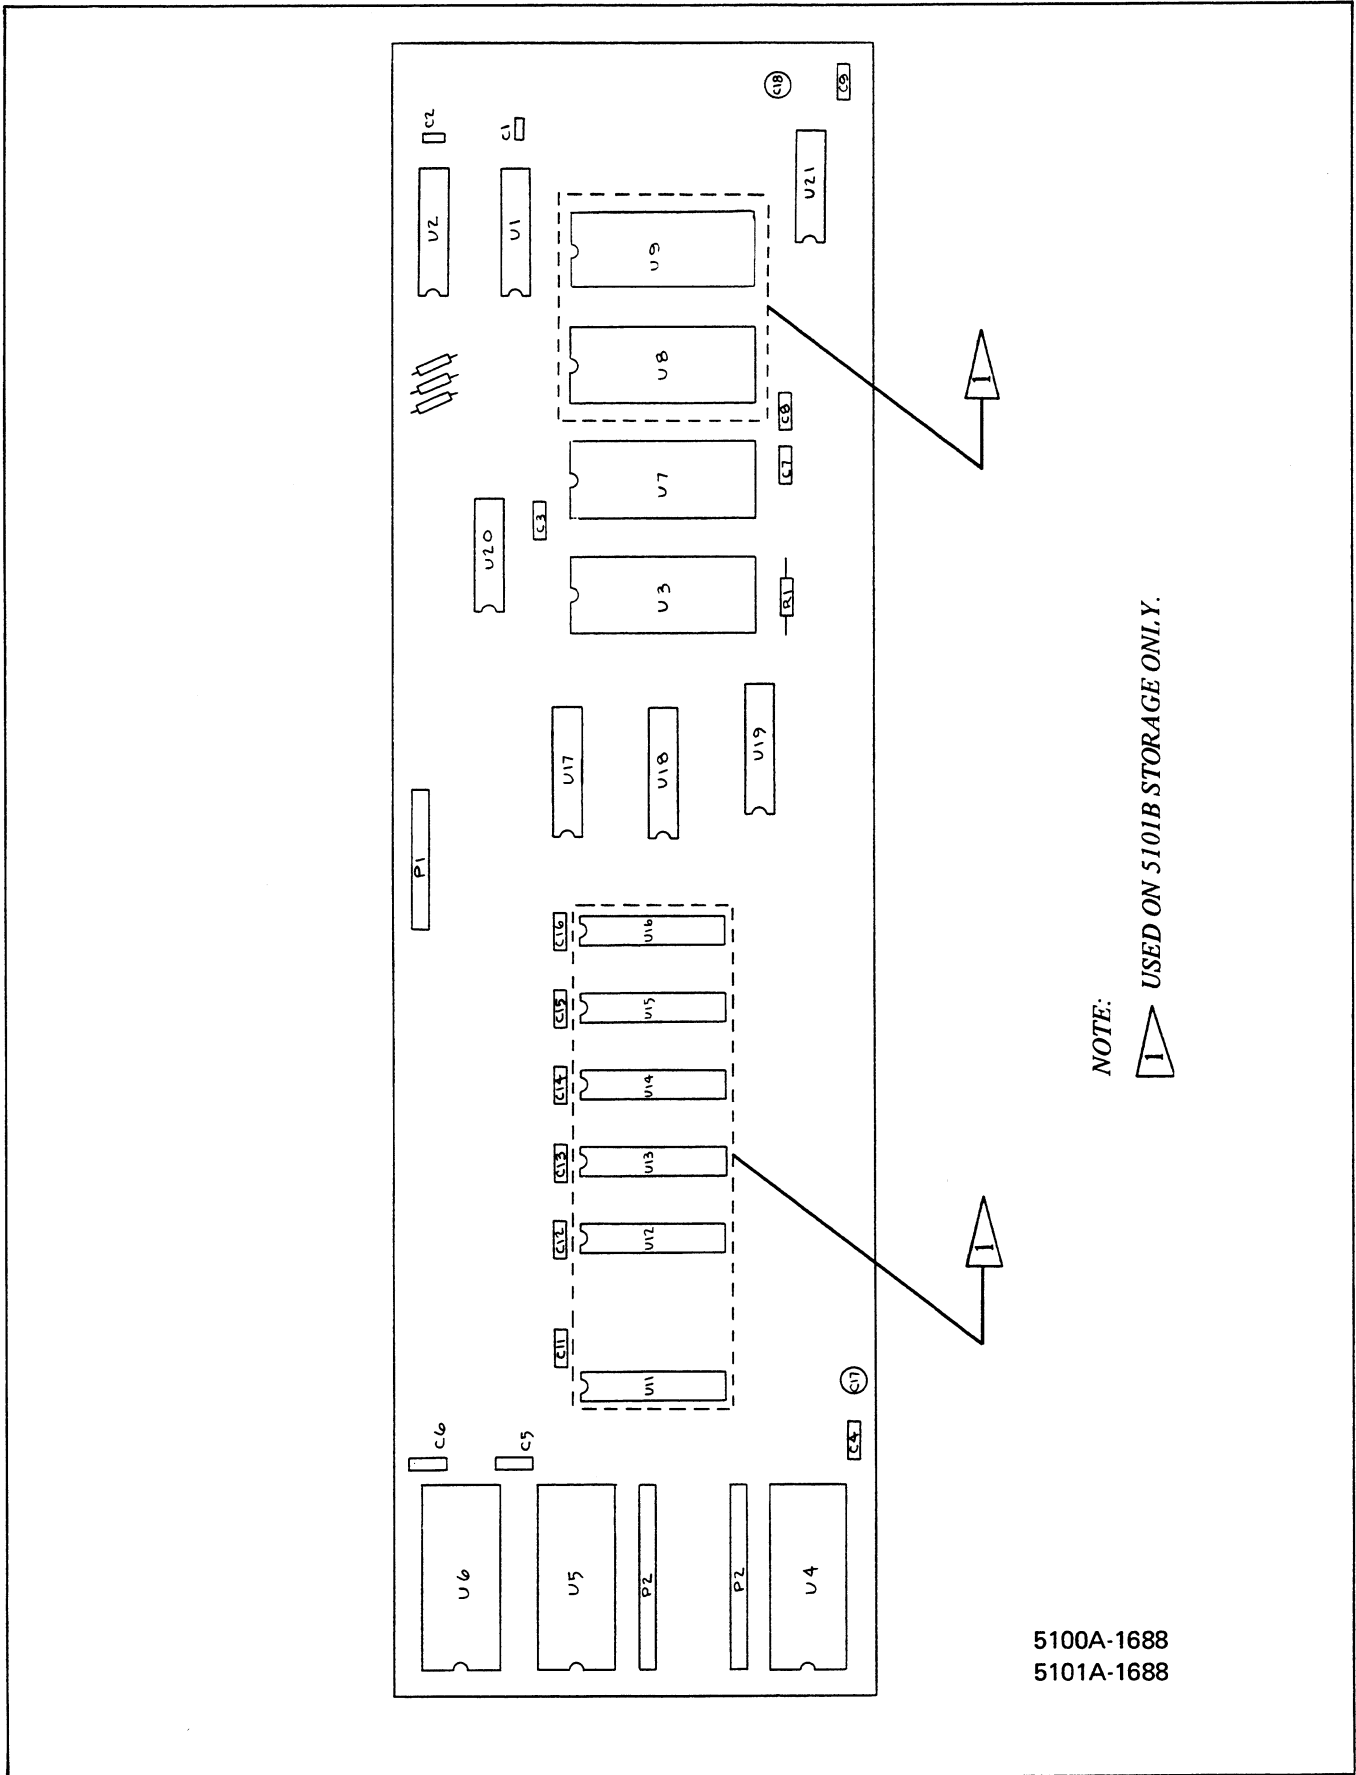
A21 PROM-ROM-RAM PCB Assembly
